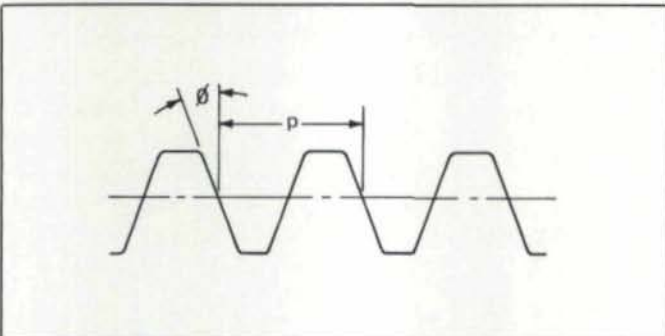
An involute tooth form gear of infinite pitch diameter is called a Rack. The teeth have straight sides whose angle equals the chosen pressure angle.
